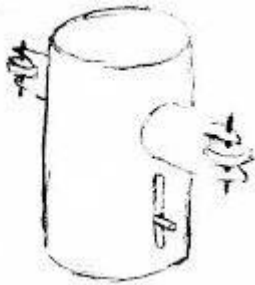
This is a visual representation of an isometric view of the spring/trigger chamber. The slotted hole on the side is intended to be used to insert a pin to keep the bottom plate from rotating when the compressed length is being adjusted.
